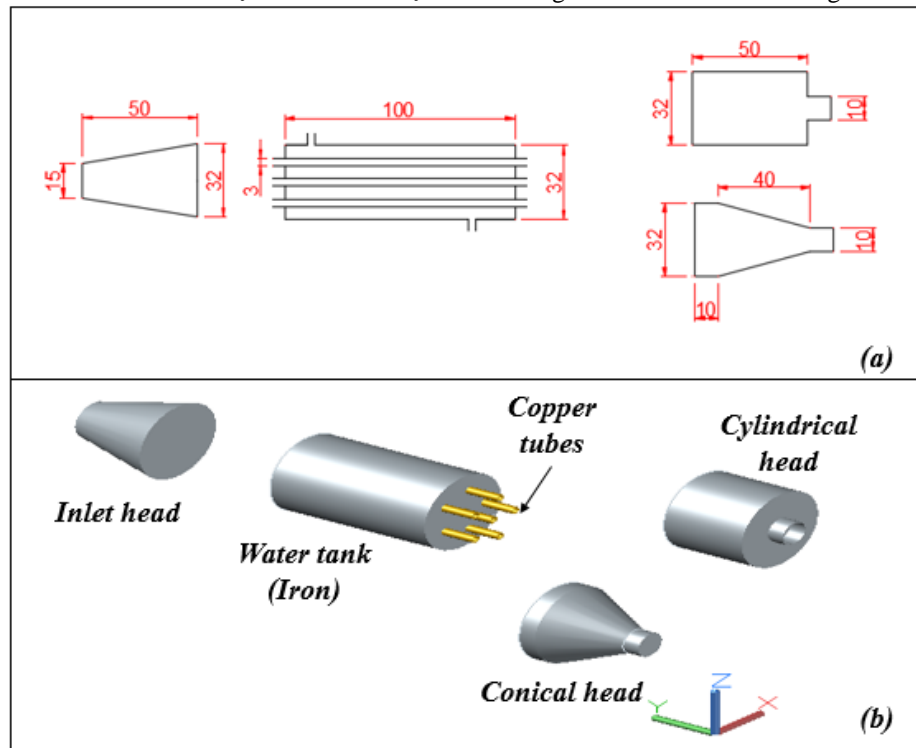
AutoCAD 2D and 3D drawing of the system.
